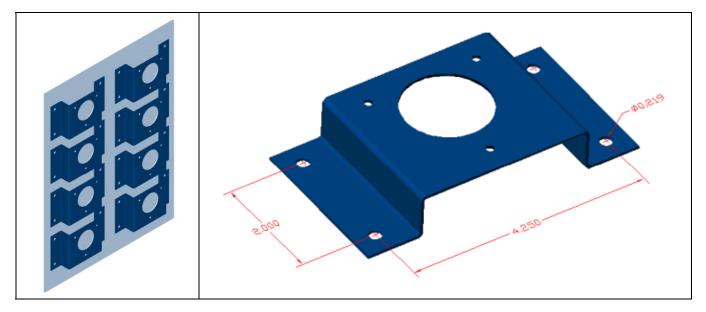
Drill and Tapping Holes for a Bracket on a Plate
